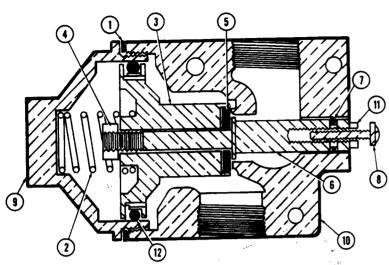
A. FLUSH VALVE ASSEMBLY WITH ORANGE CAP (466160-001).
